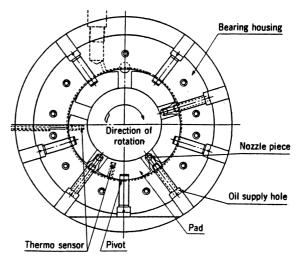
Direct Lubrication Type Tilting Pad Journal Bearing by MHI.
